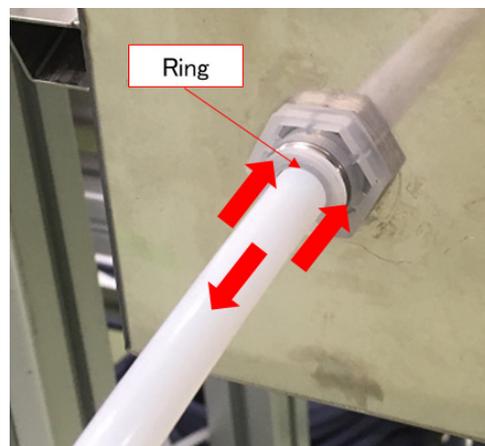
Pull out the tube while pushing the ring uniformly.
